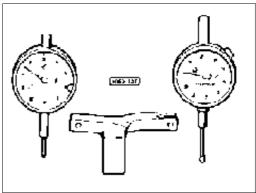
No. 5.9030.616.4 engine timing equipment.
